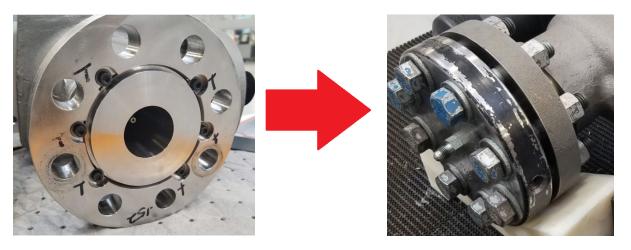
Illustration of Raised Face Style Diverging Sleeve
